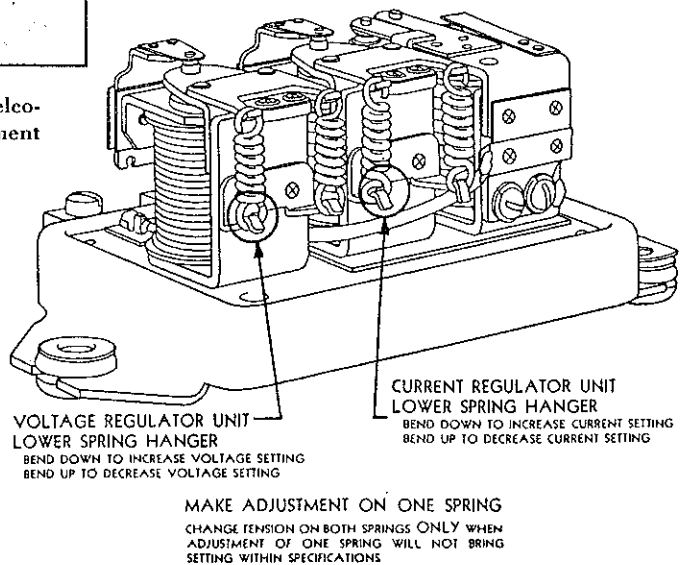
Electrical settings of Delco-Remy single core regulators which are adjusted by bending spring hangers
